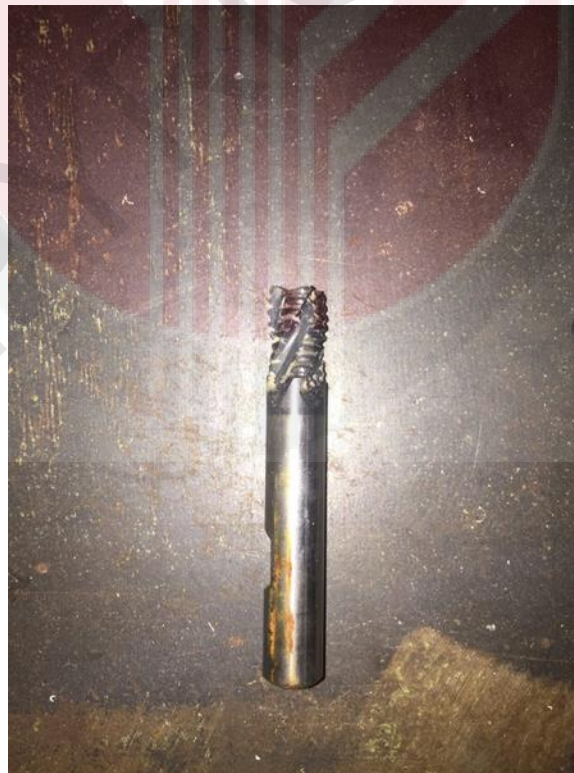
Cutting OPF Using End Mill Bit
